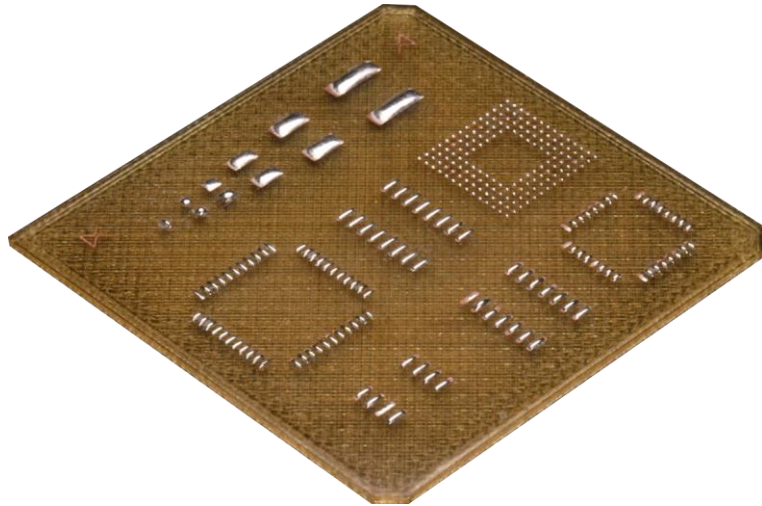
Solder test board without components after reflow, to verify solder wettability
